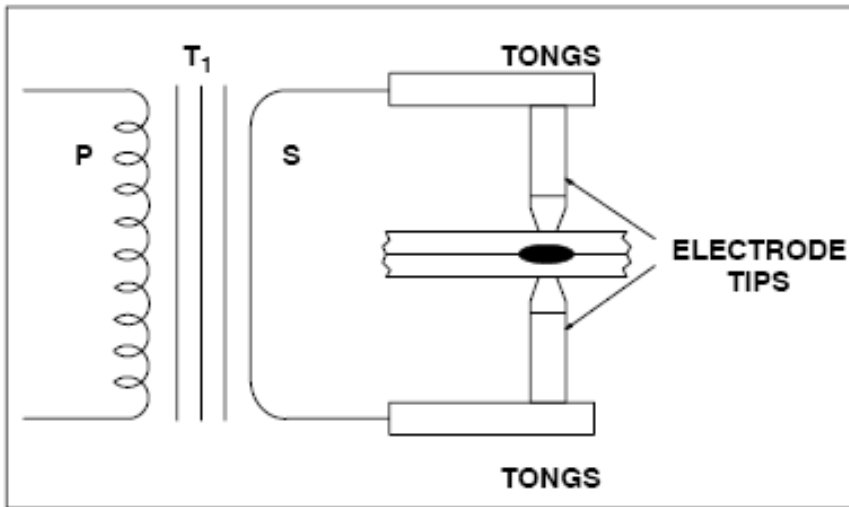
Resistance Spot Welding Machine with Work.
